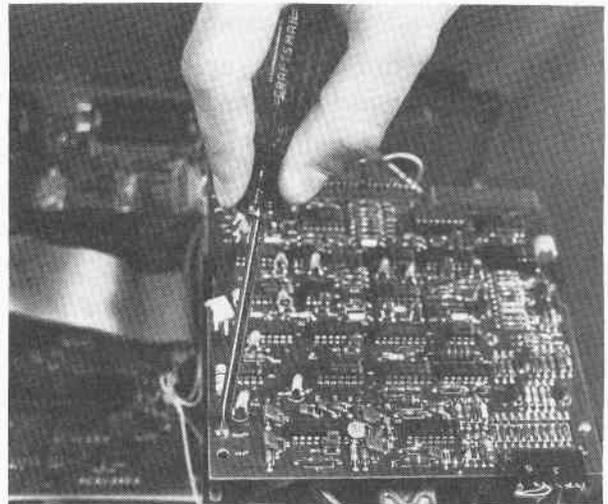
Remove the two Phillips screws holding the analog card on the drive mechanism.
